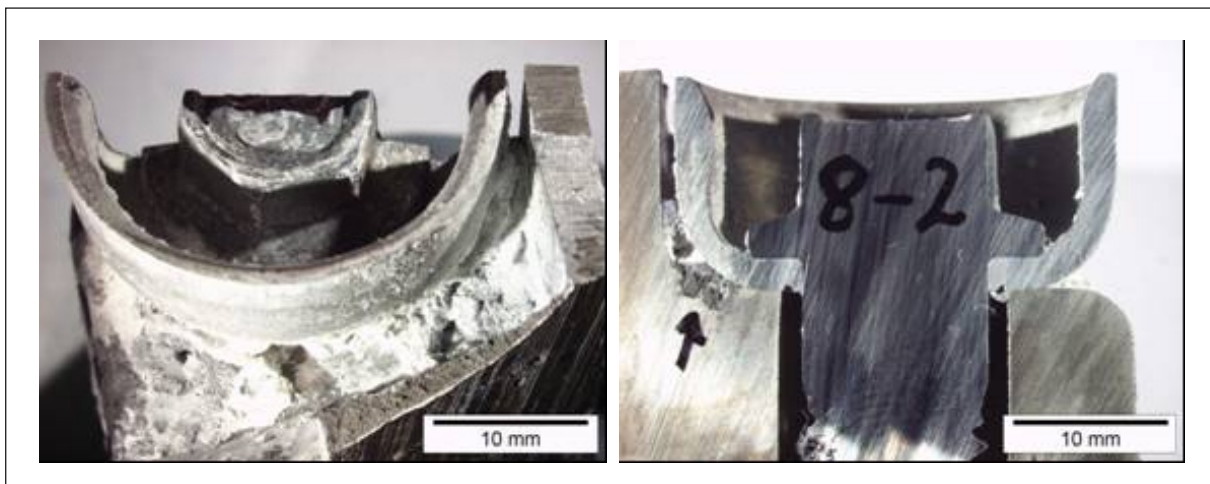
Side view and longitudinal cut of 9.8 steel bolt, electroplated with Al cup washer after 720 hours salt spray test
